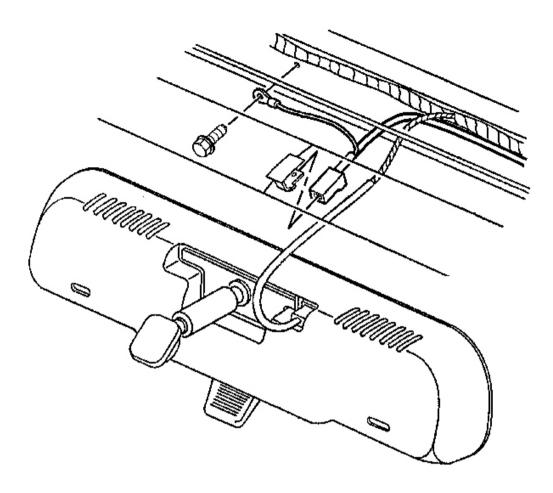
Coaxial Cable At Front Windshield Antenna Connector Courtesy of GENERAL MOTORS CORP.
